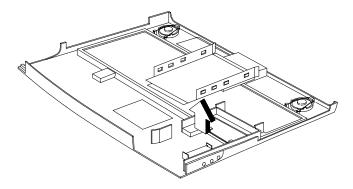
Removing the Hard Disk Drive Heat Sink
